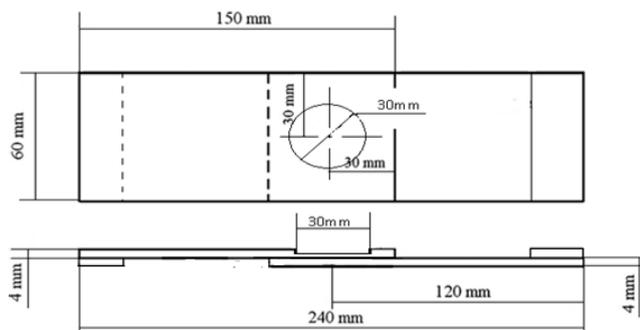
Tool position and specimen geometry for the FSSW process, /29/.
